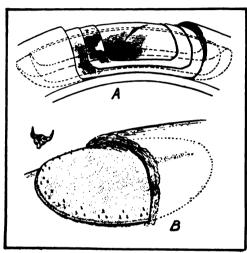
At A, Method of Stepping Down Fabric and Tread of Outer Casing when Repairing Blowout by Sectional Vulcanizing Process. At B, an Inside Patch that is Held in Place by Mechanical Means Instead of Cement is Shown.
